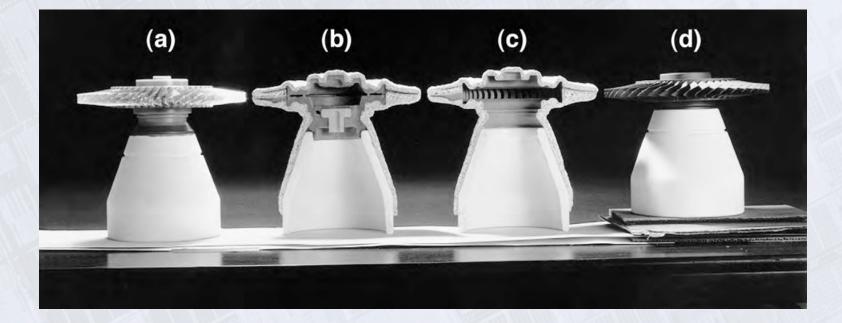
Investment casting of an integrally cast rotor for a gas turbine. (a) Wax pattern assembly. (b) Ceramic shell around wax pattern. (c) Wax is melted out and the mold is filled, under a vacuum, with molten superalloy. (d) The cast rotor, produced to net or near-net shape. *Source*: Courtesy of Howmet Corporation.
